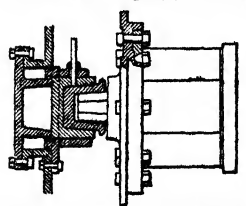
Gudgeon, chilled-iron thimble and step bearing for wooden log.
